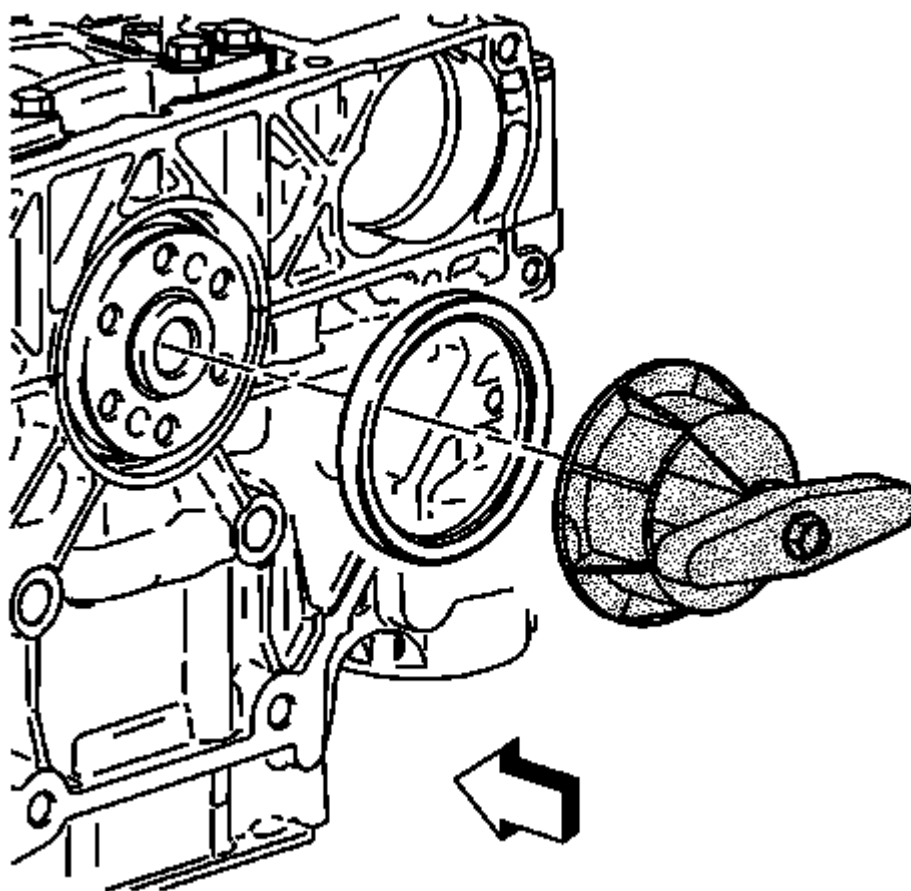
View Of Crankshaft Rear Oil Seal & Special Tool J 42067
